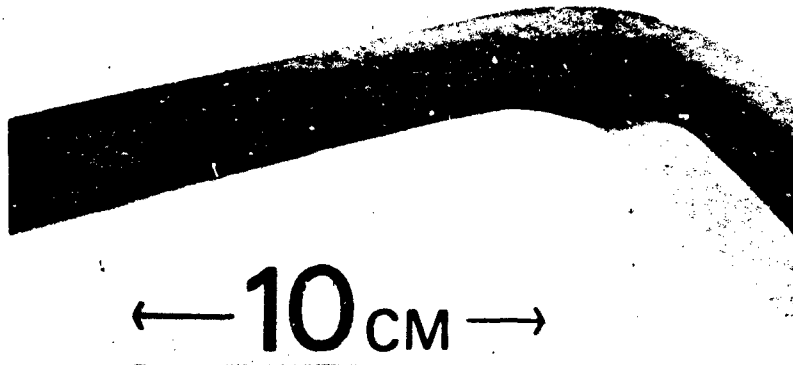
Crack at 90° bend in stainless steel desuperheater tube.
